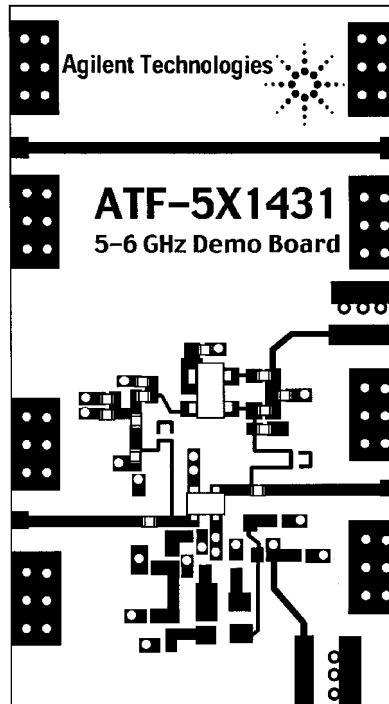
Component Placement Drawing for the 5.725 - 5.825 GHz ATF-54143 Driver Amplifier
